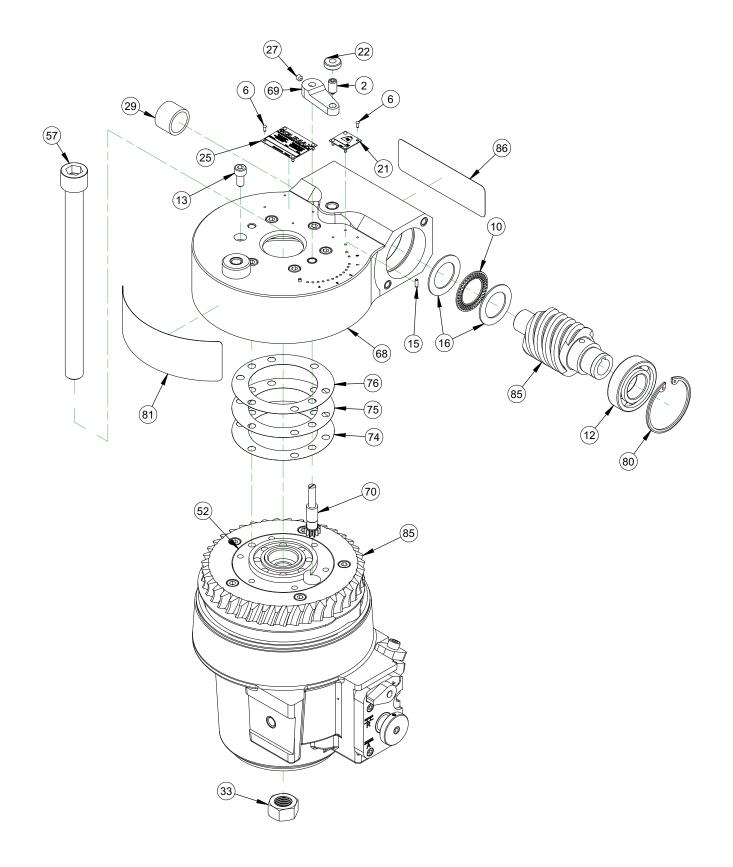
FF5300 ASSEMBLY 3 (P/N 89900)
